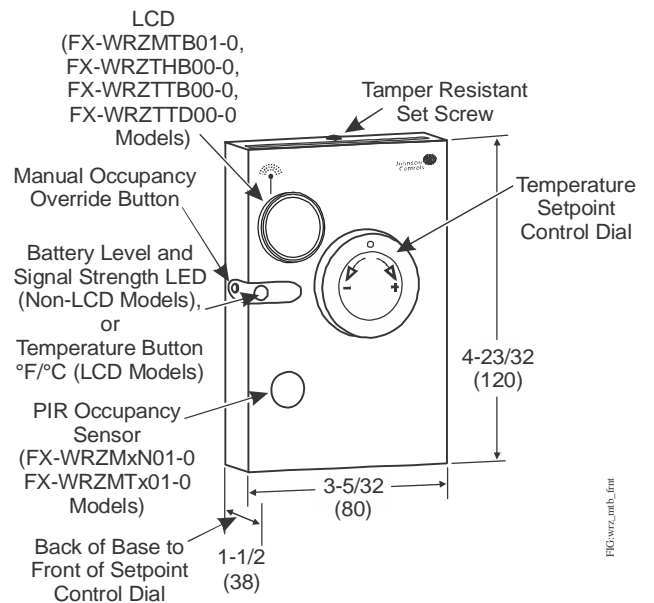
FX-WRZ Series Wireless Room Sensor Physical Features and Dimensions, in. (mm)
